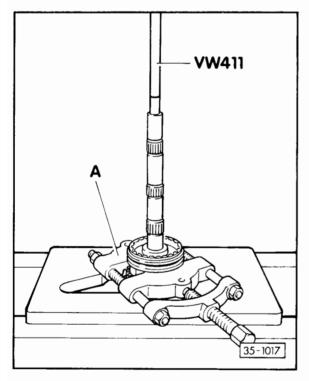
Pressing off sleeve/synchronizer hub with 1st gear wheel
